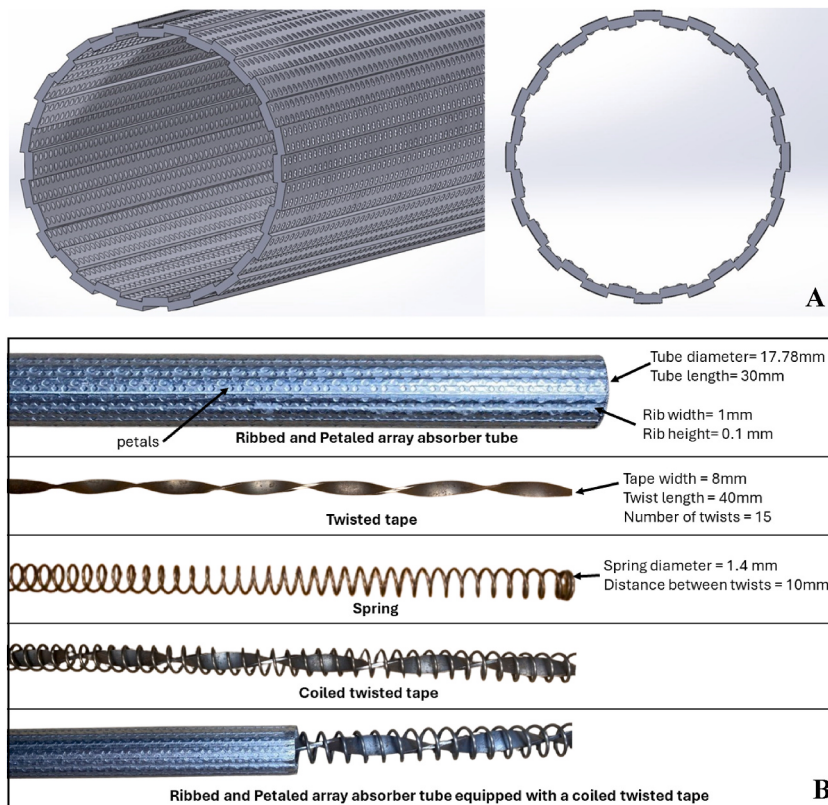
A) a SolidWorks module and B) real picture and geometrical specification of the tube used in this study.
